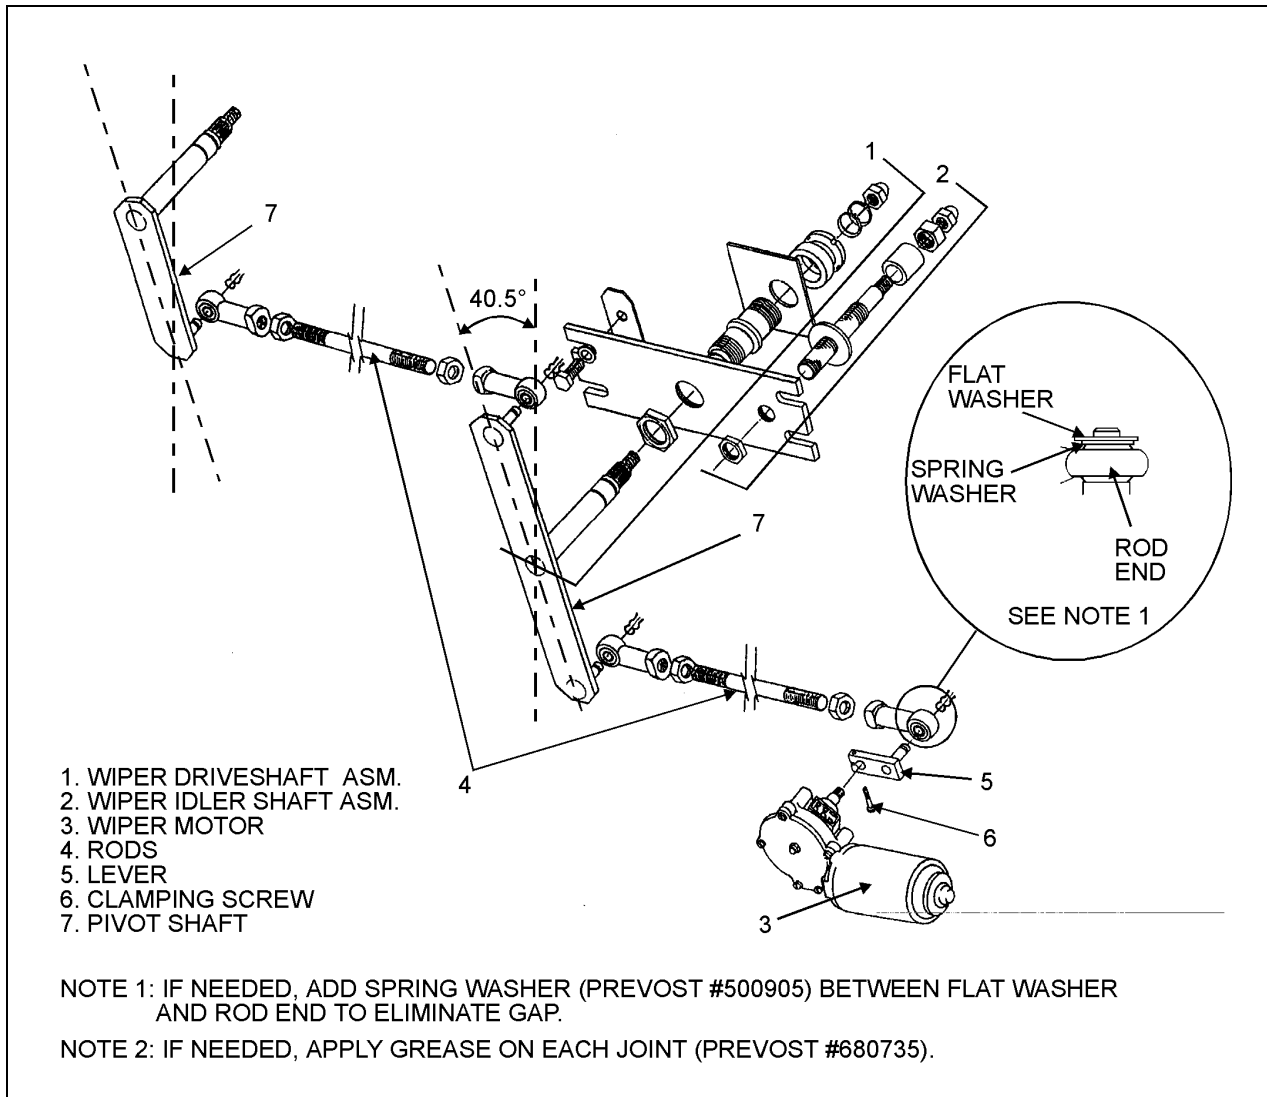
LOWER WINDSHIELD WIPER INSTALLATION
